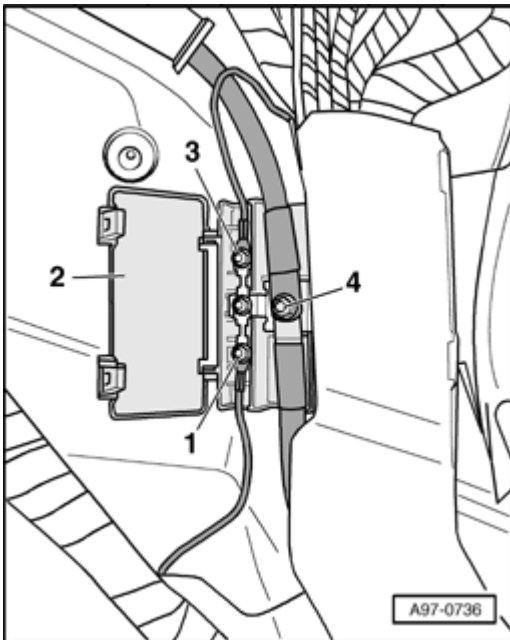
Identifying Terminal 30 Wire To Starter Cap & Nut
